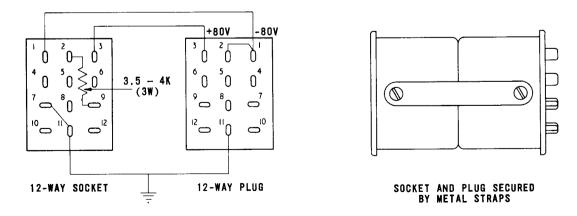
12-WAY PLUG AND SOCKET ADAPTOR
